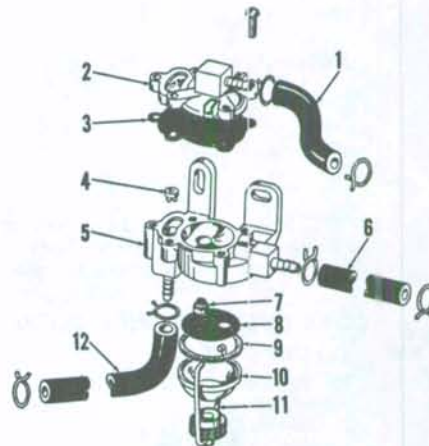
Exploded view of diaphragm type fuel pump. Refer also to Fig. Mc5-5.
